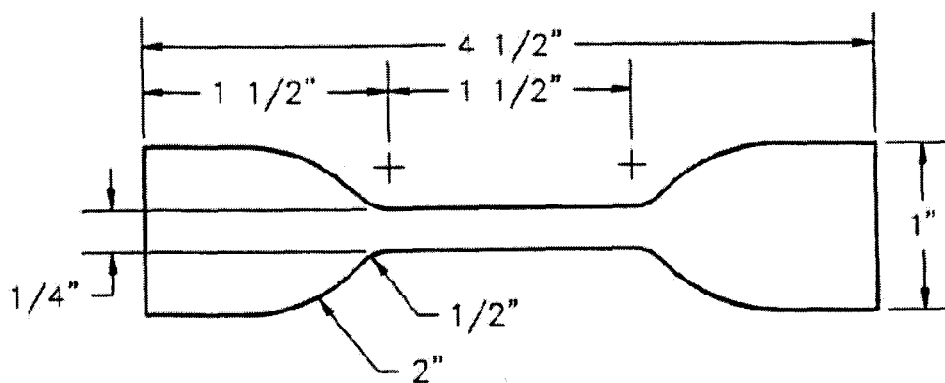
Dimensions of the rubber coupon used for tensile testing
